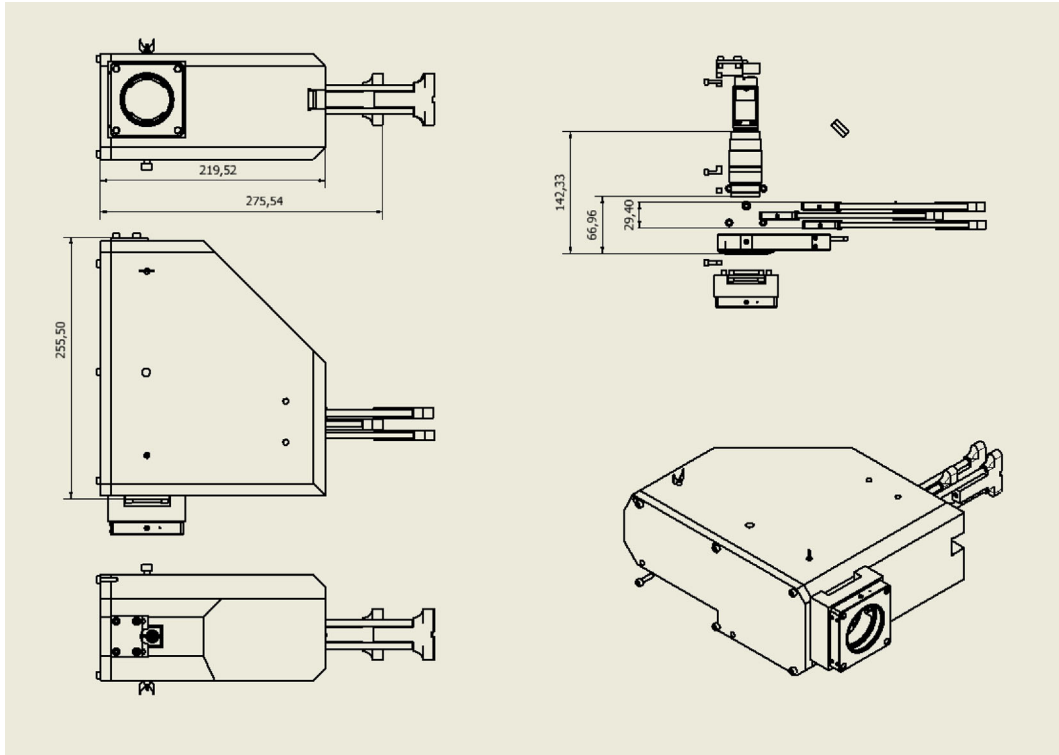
Technical drawing of the PANIC instrument with its 3D-printed case. Measurements are given in mm.
